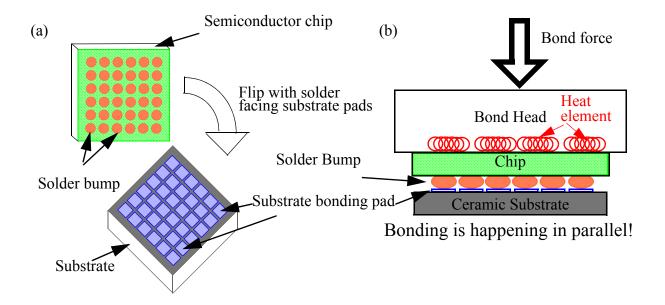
General Flip Chip Process (a) 3D view (b) 2D view
